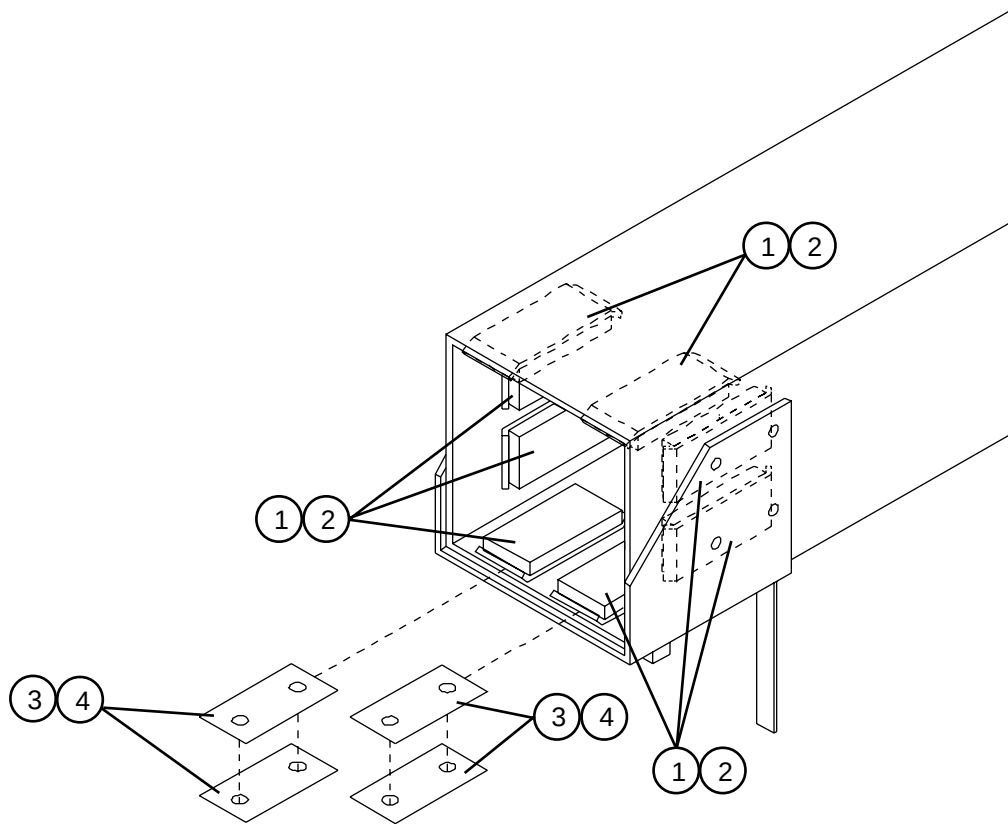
TELESCOPIC BOOM WEAR PADS
